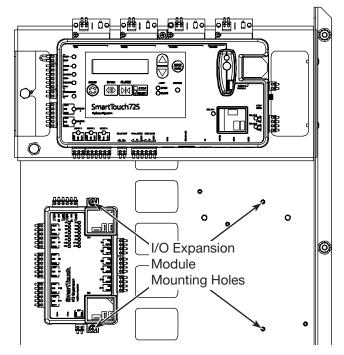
SmartTouch 720/725 I/O Expansion Module Mounting Holes
